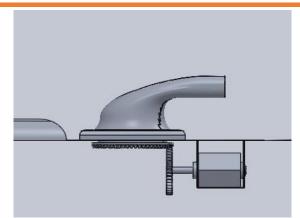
, The mechanism of the bow thruster drive with an electric motor (front view)
